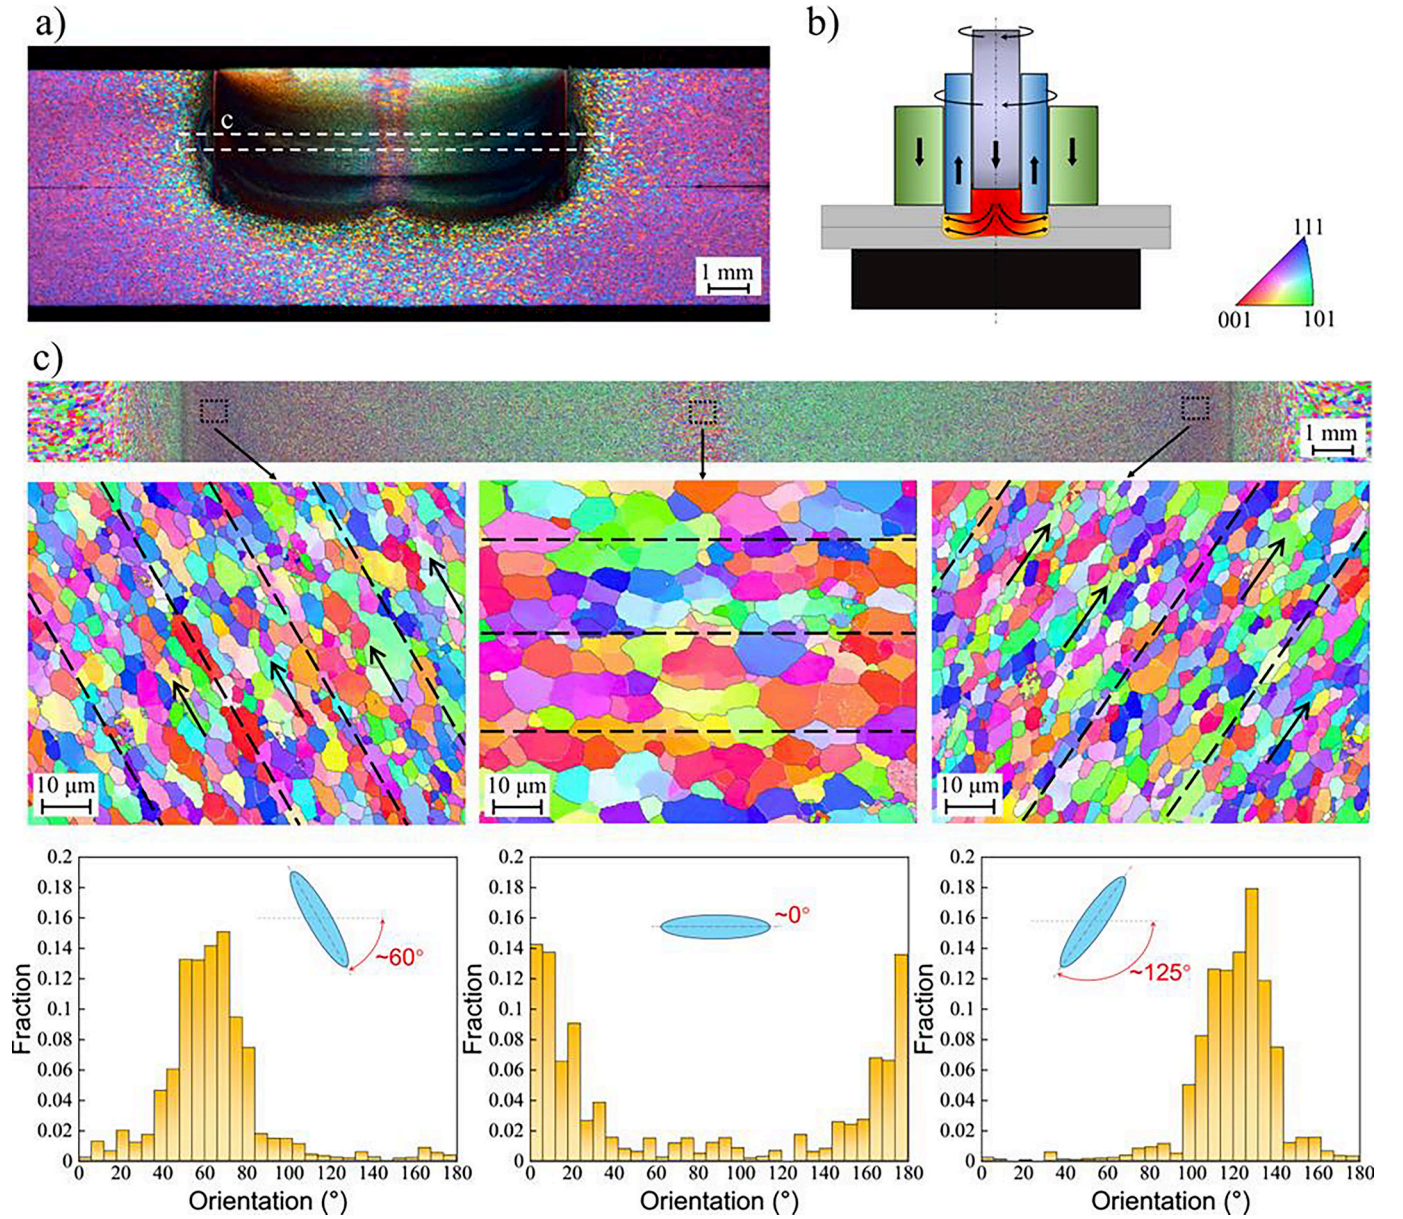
(a) Optical image of the weld cross-section, (b) material flow scheme during the refill stage of the weld, and (c) EBSD maps and analysis of grain shape orientation at indicated locations in the weld.
